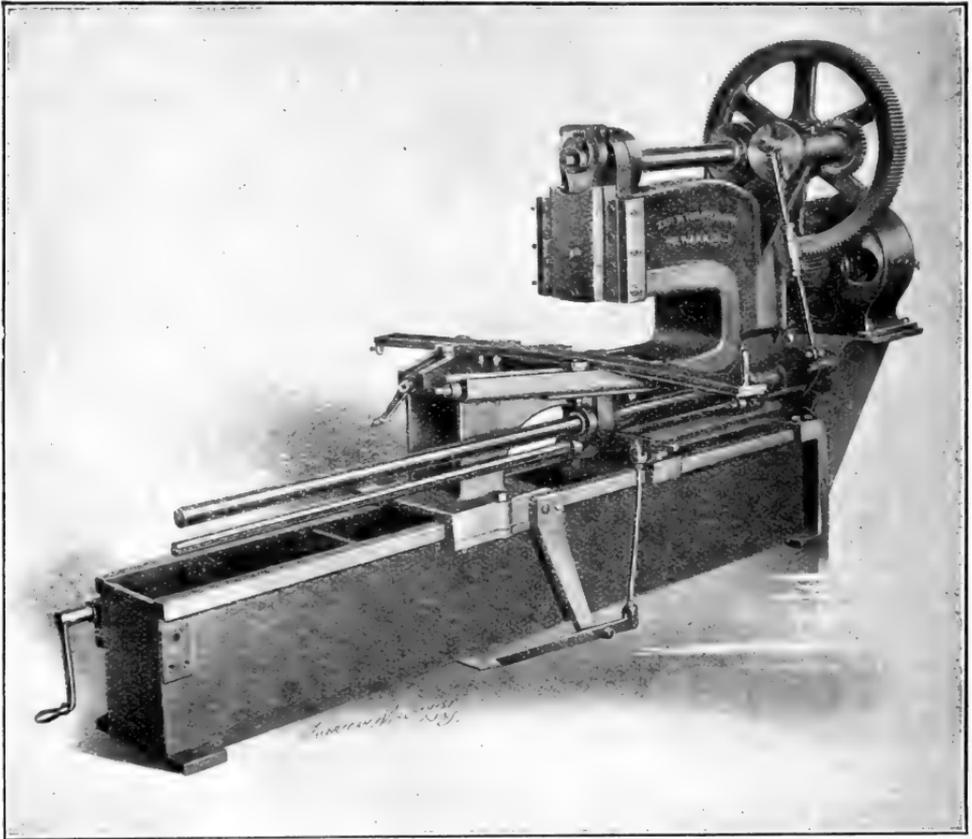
Photo of Notching Machine. Zeh & Hahnemann.
